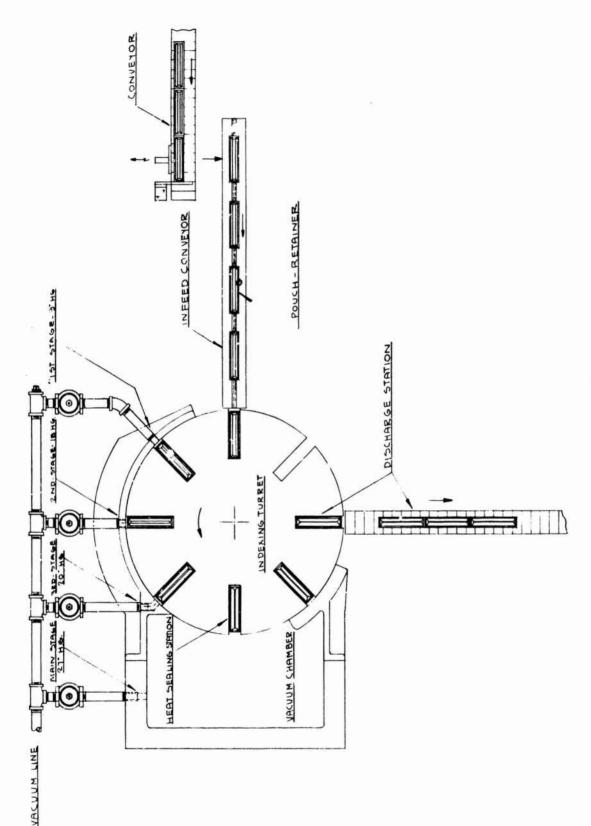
Vacuumizing and Heat Sealing Module (216 VUC Machine)
